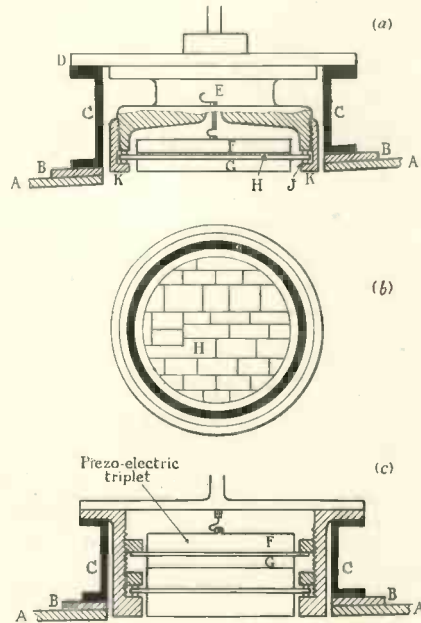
(a) Section through a projector as fitted. A = skin of ship, B = stiffening ring, C = hull casting, D = projector mounting, E = projector case, F = inner plate, G = outer plate, H = quartz, J = rubber pads, K = cap. (b) Section through quartz. (c) Demountable projector.
